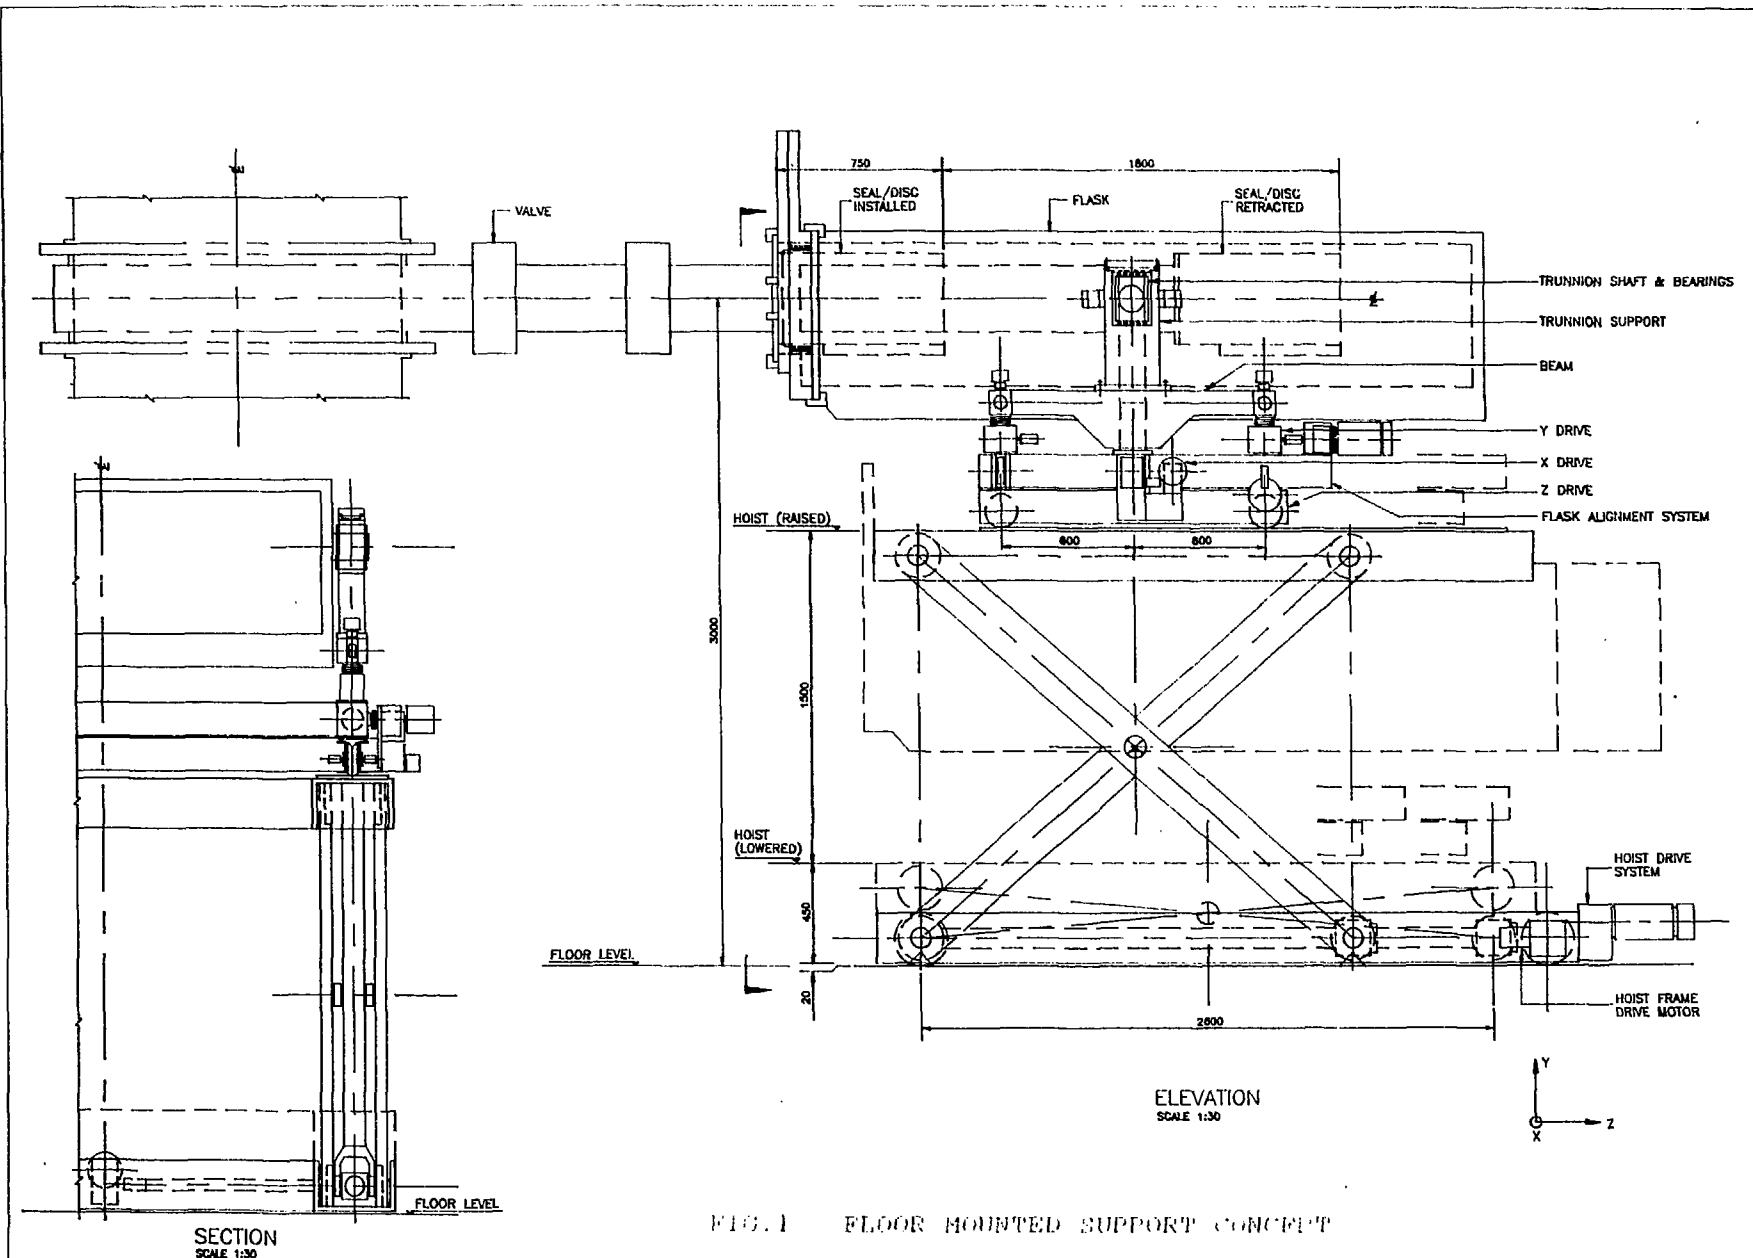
FLOOR MOUNTED SUPPORT CONCEPT
